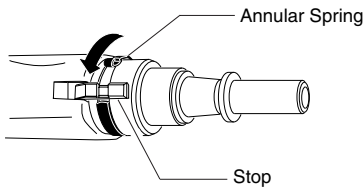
Inserting Barrel Assembly into Outer Liner Assembly
